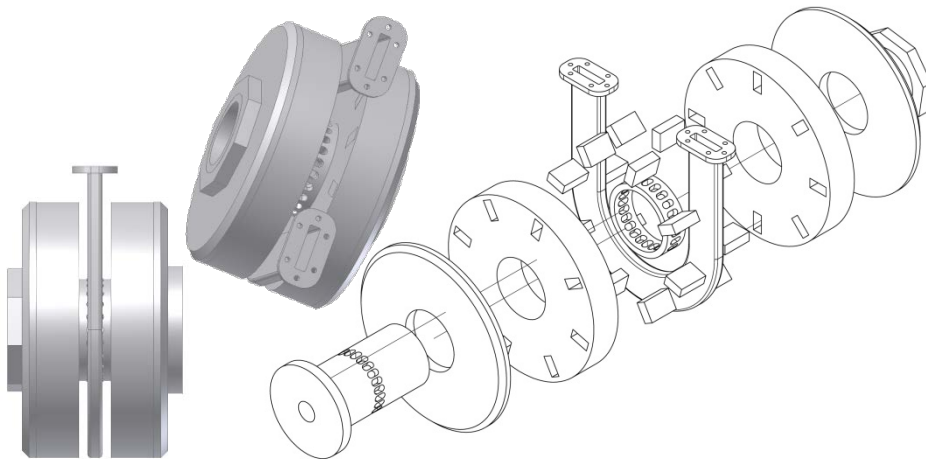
Permanent magnets MHD pump design, assembled, two images on left side and disassembled on the right part.
